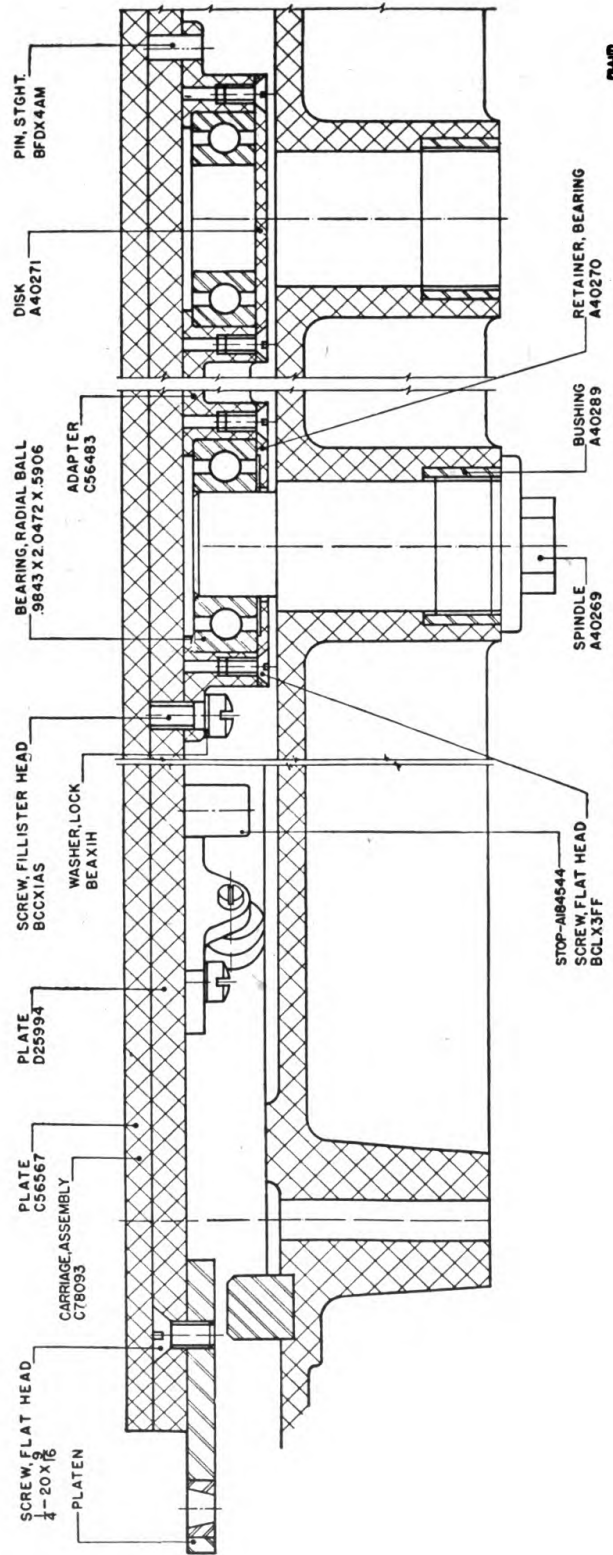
Board, plotting, sound ranging, M1—plan and sectioned views.
